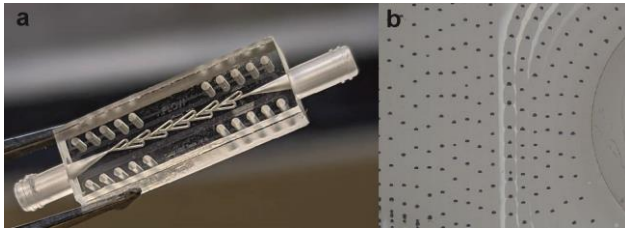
(a) A microfluidic chip with a Tesla valve made of one SLE structured fused silica chip bonded by laser welding to a second non-structured fused silica cover glass manufactured at the Institute of Microsystems Technology at Hamburg University of Technology. (b) Magnification of parallel welding seams with a width of one single seam of 50 μm .
